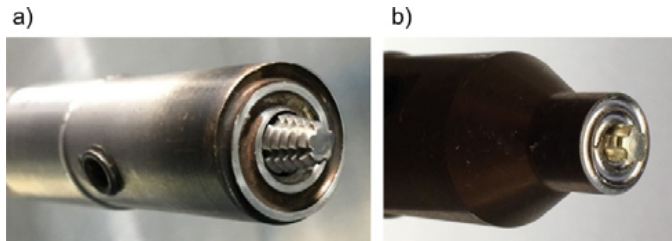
FSW tool dimension, a) 15 mm in diameter., b) 12 mm in diameter
